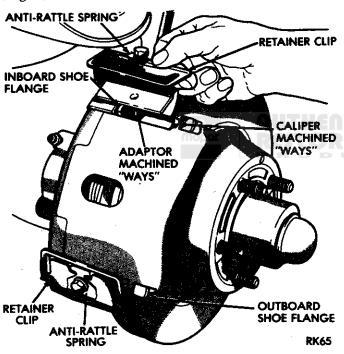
Removing/Installing Retainer Clips and Anti-Rattle Springs
